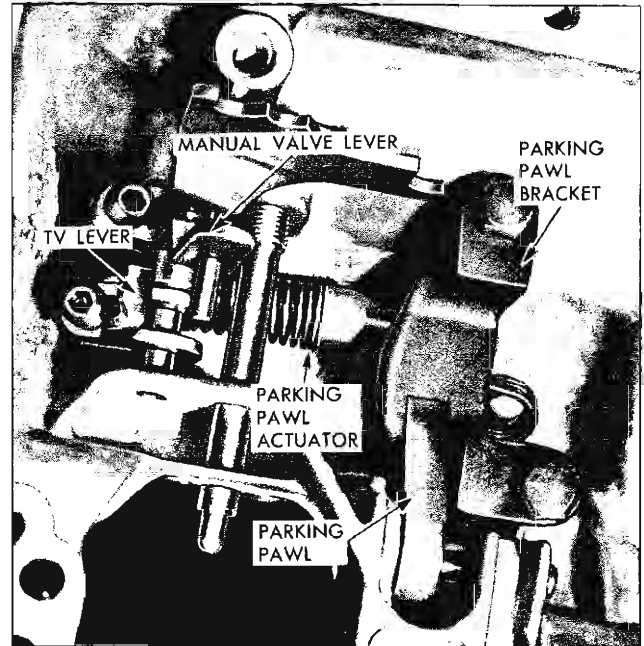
PG—Inner Control Levers, Parking Pawl and Bracket
